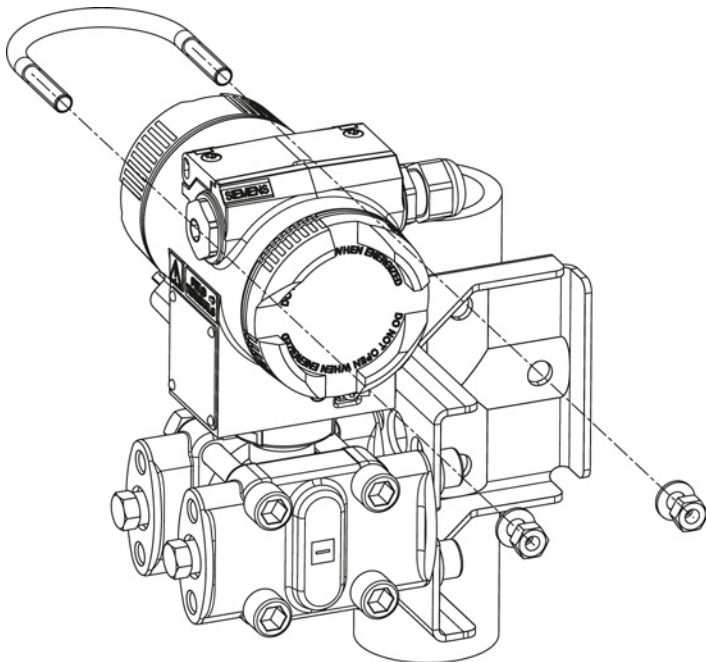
An example of fastening the transmitter on the mounting bracket in the case of differential pressure and horizontal differential pressure lines
